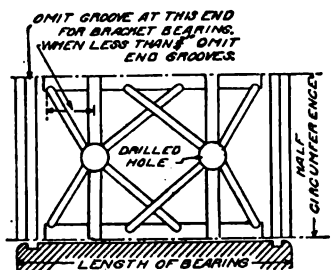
SEC. 7a.—Double ring oiled bearing. Oil groove layout.
